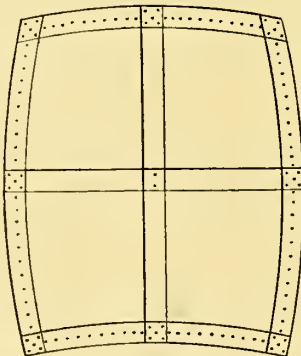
TEMPLATE READY FOR MARKING NEXT SHEET
